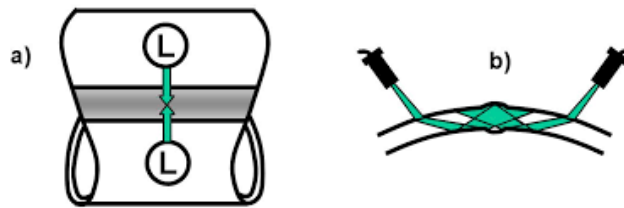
Longitudinal Defect Detection. a) top view of probe pair with angular incidence with respect to the weld, b) cross-sectional view of probe pair and pipe, here shown for the detection of external defects.
